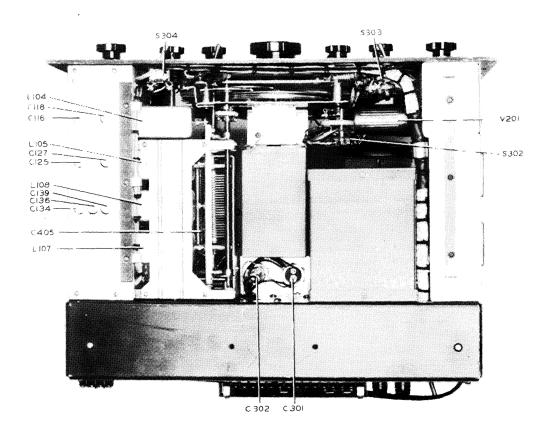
3 327 2 PARTS ARRANGEMENT-BOTTOM VIEW
